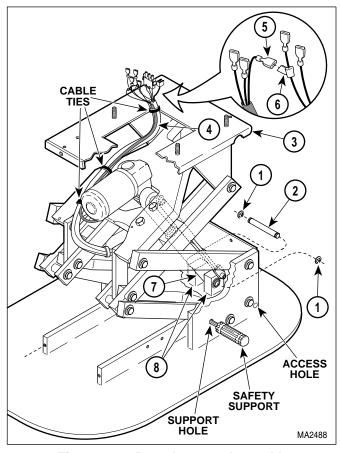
Base Actuator Assembly Disconnection/Connection
